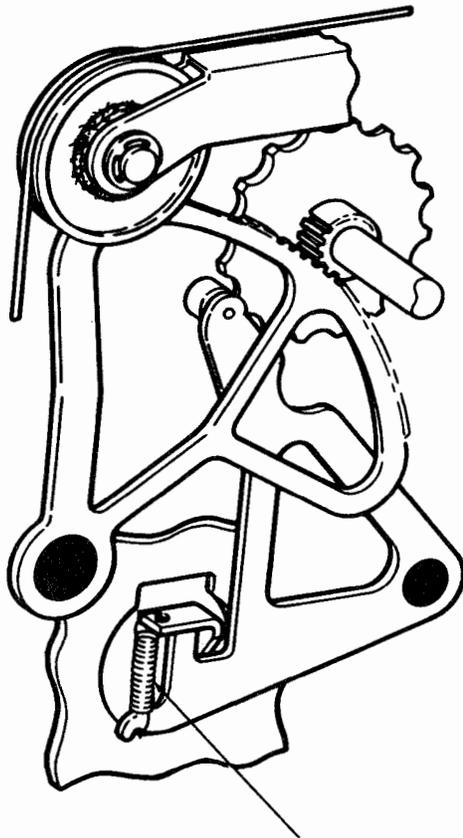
Rear Section of Unit Used in Connection With Front Plate Assembly Removal
